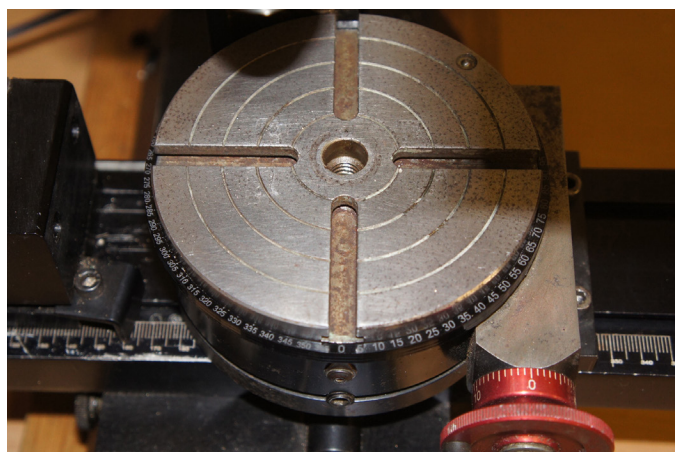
A closeup view of William's press-fit dial prototype mounted on his rotary table.
